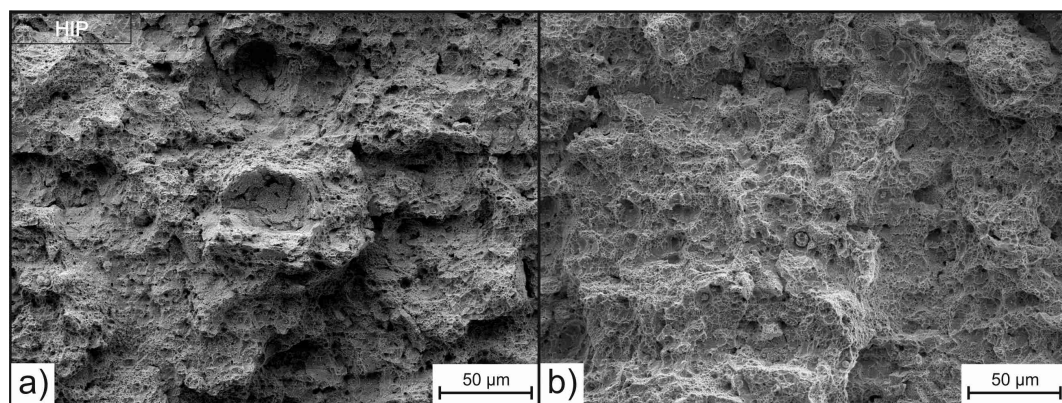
Overview of fracture surface, HIP specimen
